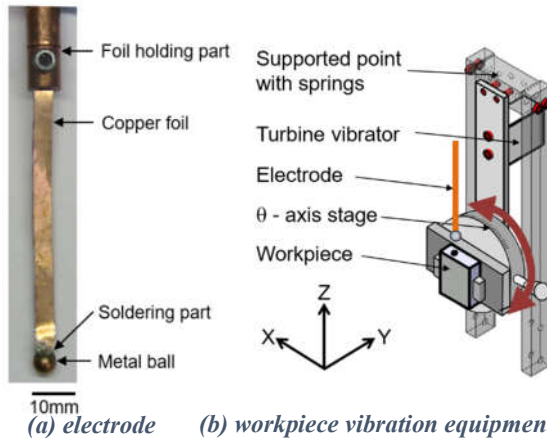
Appearances of suspended ball electrode and workpiece vibration equipment
